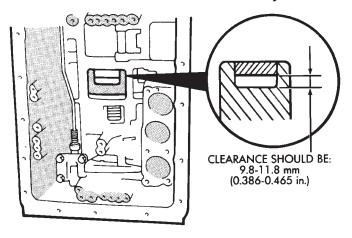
Installing Front Planetary And Forward–Direct Clutch Assembly
